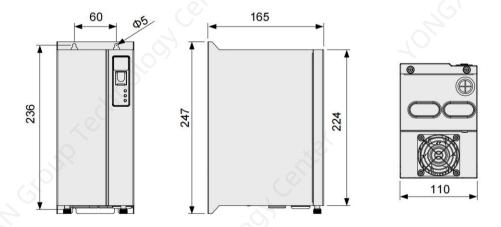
Appearance and mounting dimension diagram of braking unit (unit: mm)
